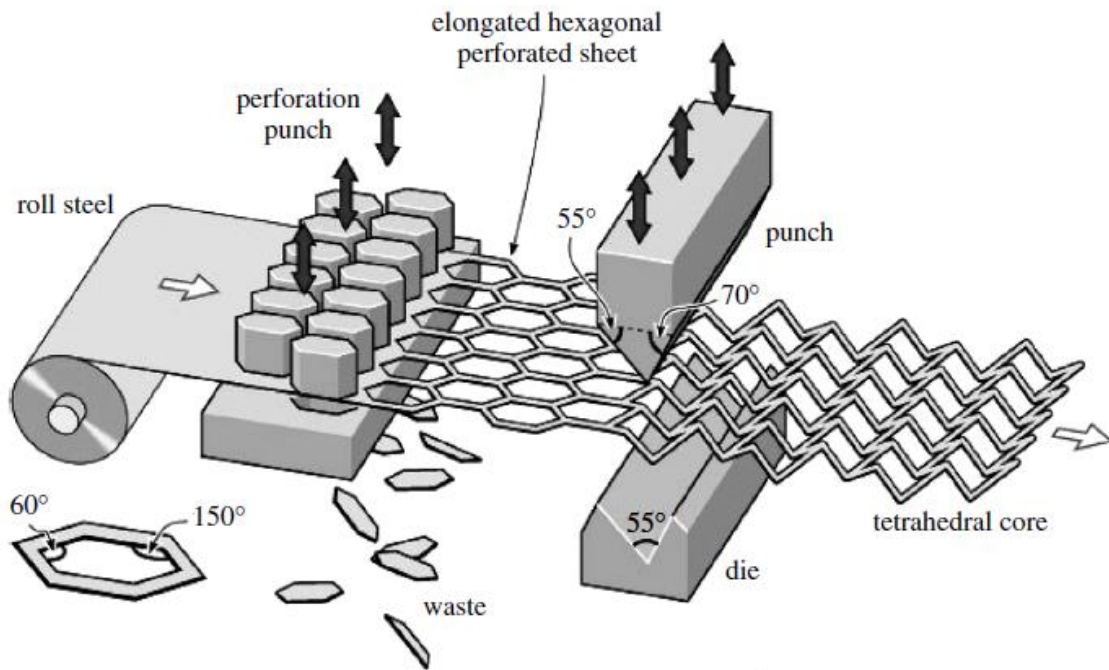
Perforated metal sheet forming technique to fabricate lattice-truss architectures. A roll of sheet metal is perforated with a nested pattern of hexagonal-shaped dies and fed into a punch that bends the sheet into a three-dimensional tetrahedral lattice-truss core. [231]
